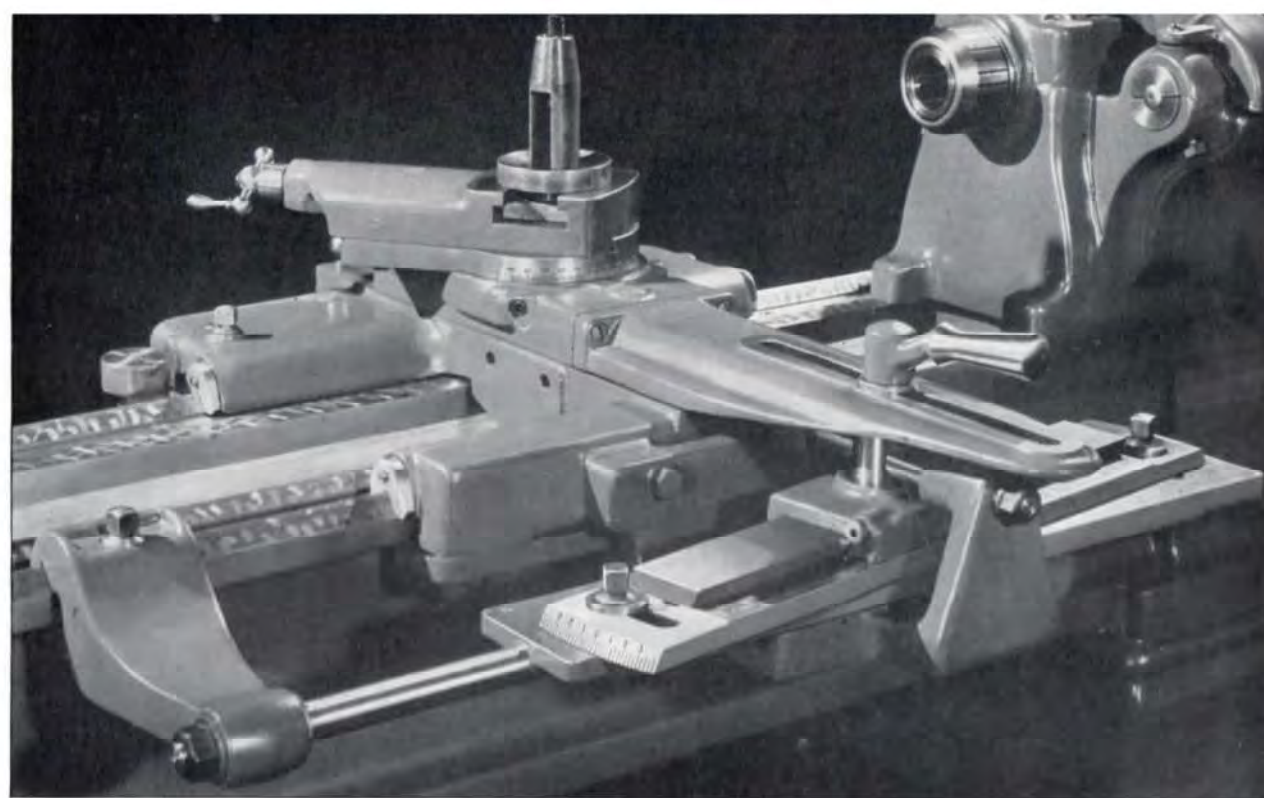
Telescopic Taper Attachment for 10-inch and Larger South Bend Lathes
